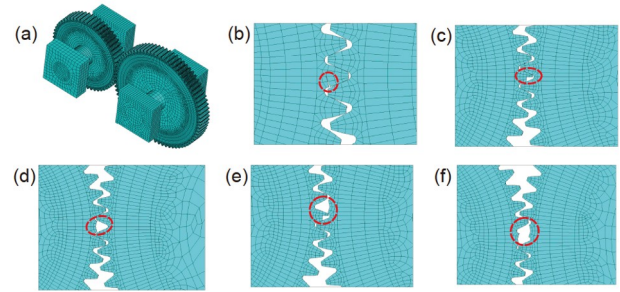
(Color online) Gearbox FEM model and fault types. (a) Gearbox model; (b) TCF; (c) TSF; (d) GBF; (e) TSBF; (f) GTBF.
